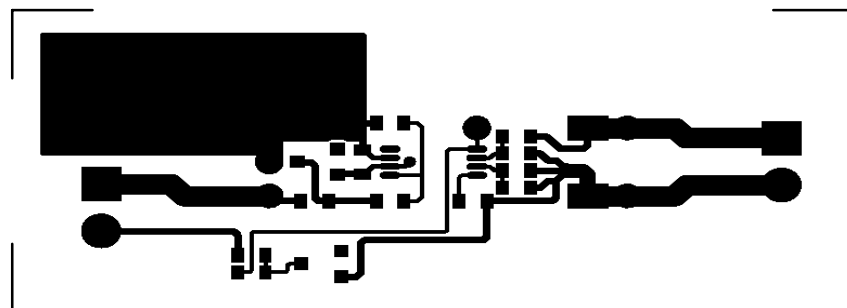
bq26200EVM-001 Circuit Module Layouts (Continued)
